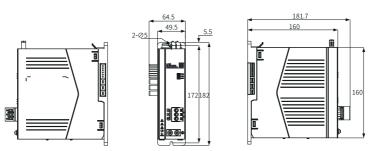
Overall and mounting dimensions of the single-axis drive unit (unit: mm)
